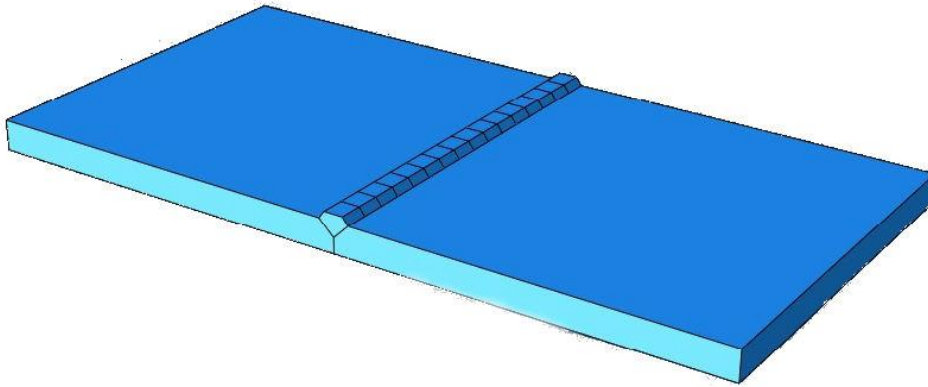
Whole drawing of the thin plates and welding seam.
